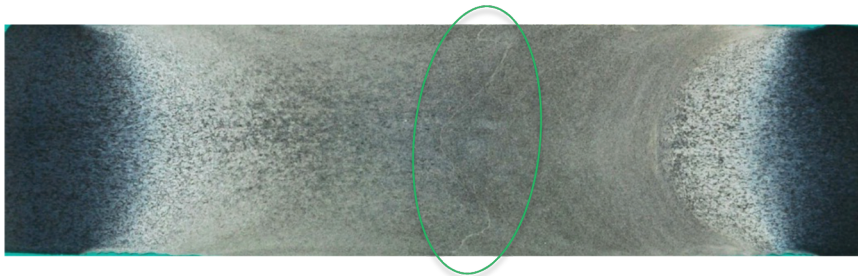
Transverse section of laser cleaned weld (20 W, Adapt Laser at MSFC). Note the fine, sharp, slightly undulating white line running from root to crown toward the center of the weld indicating ROD.
